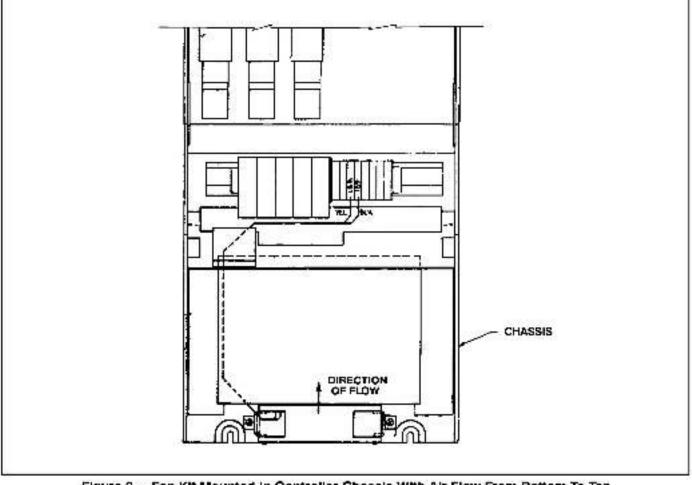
Fan Kit Mounted in Controller Chassis With Air Flow From Bottom To Top
